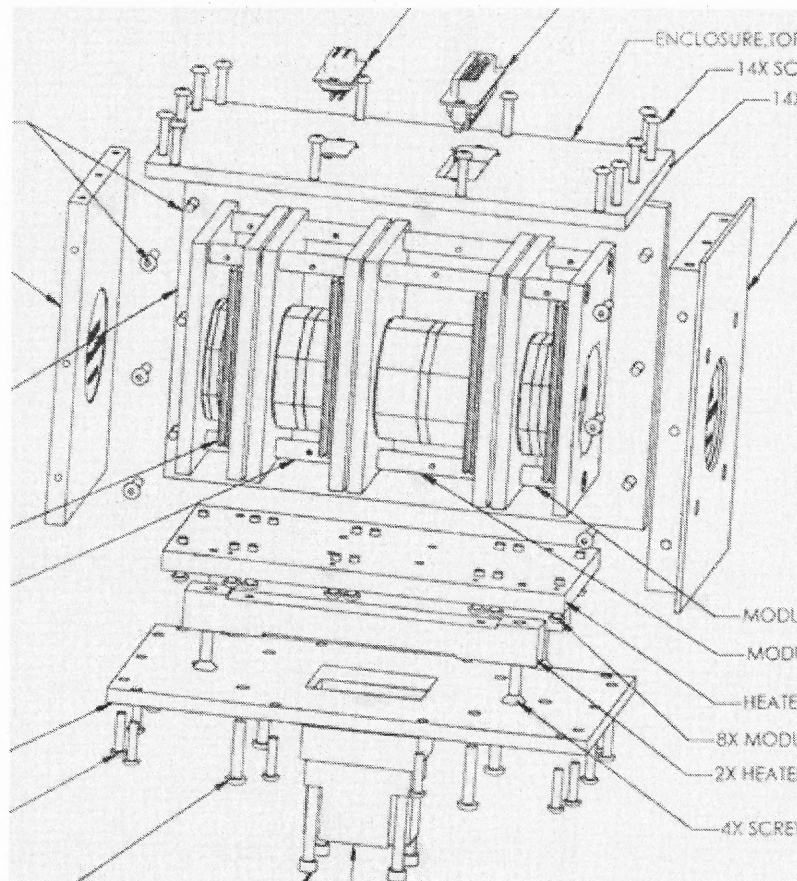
Mechanical drawings of the Lyot filter used in IRIM.
